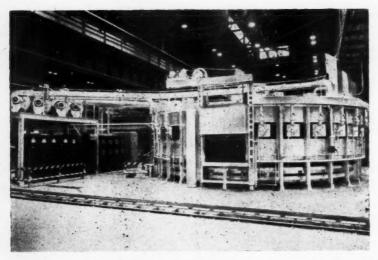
Rotary-hearth furnace for heating stock for forging. Of 30 ft. diameter, it is equipped with instruments that maintain workpiece temperature within close limits
